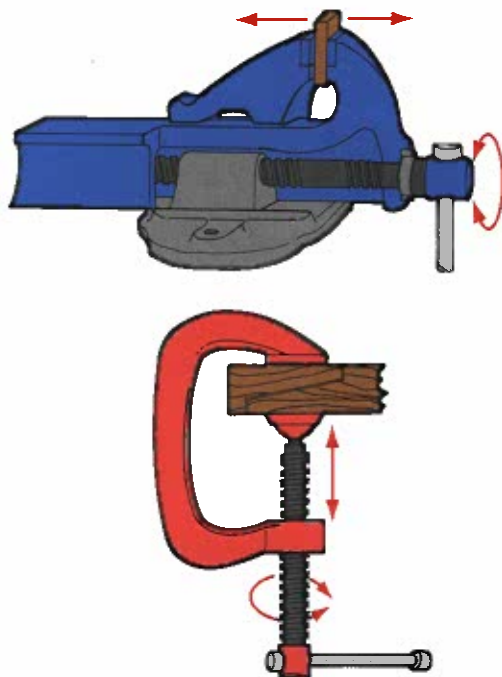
Screw threads are used on vises and C-clamps. They convert rotary motion to straight-line motion.
